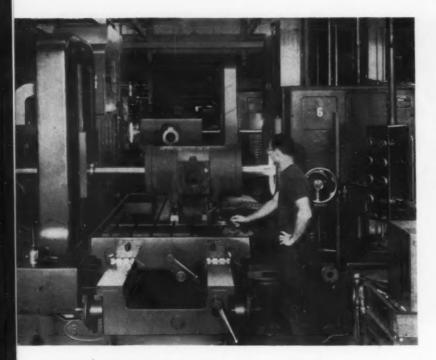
Cast-iron compressor cylinder being bored on horizontal boring mill. Facing operation is performed with casting in same setup.
